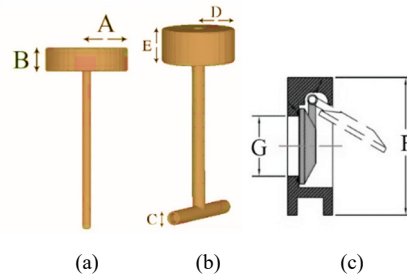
Schematic view of (a) buoy; (b) chamber; (c) inlet/outlet valve (Wafer Swing Check Valve).
